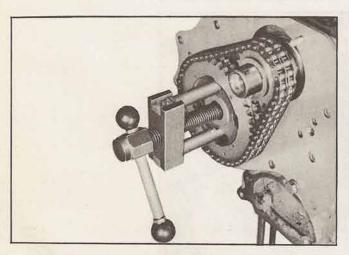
Removing Crank Gear, Cam Gear and Chain
